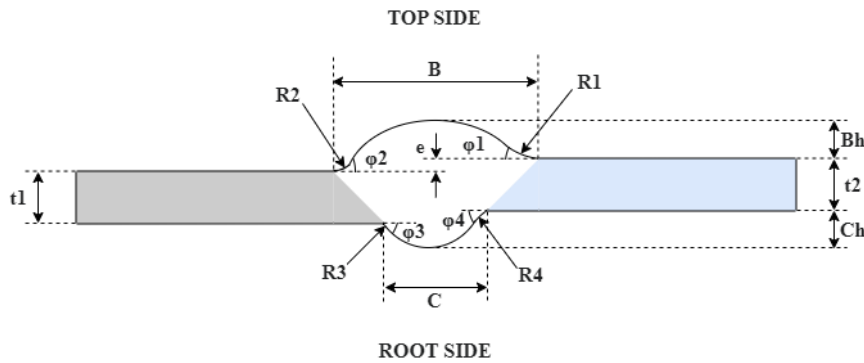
Illustration of a butt weld with the important geometric parameters
